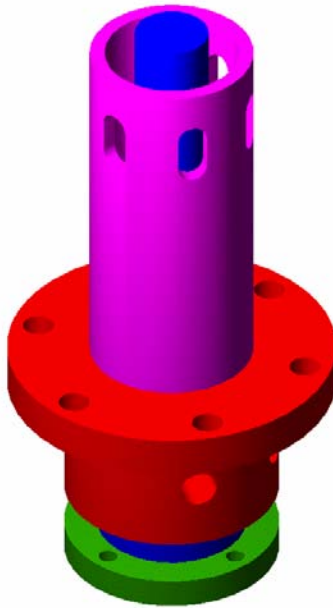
A Solidworks CAD Drawing of the Sump, Pedestal, and Clamp
